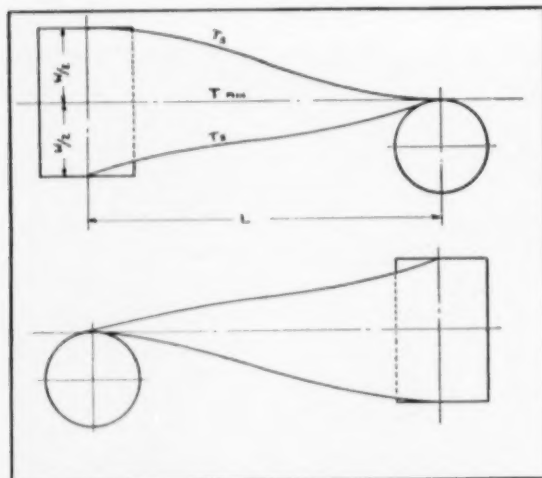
Sketch of a quarter-turn set-up, symmetrical. Side view shown here, top view below.
